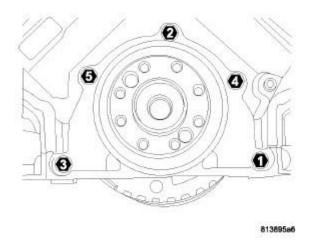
REAR SEAL RETAINER TORQUE SEQUENCE Courtesy of CHRYSLER LLC
